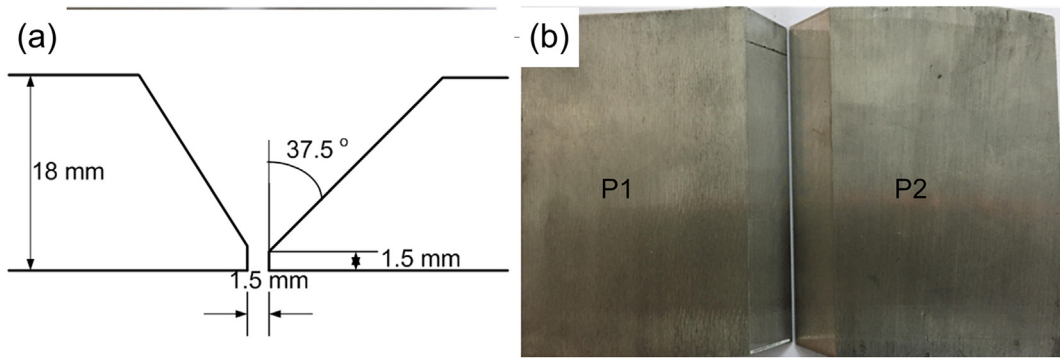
(a) Weld groove design (b) plate after groove preparation.
